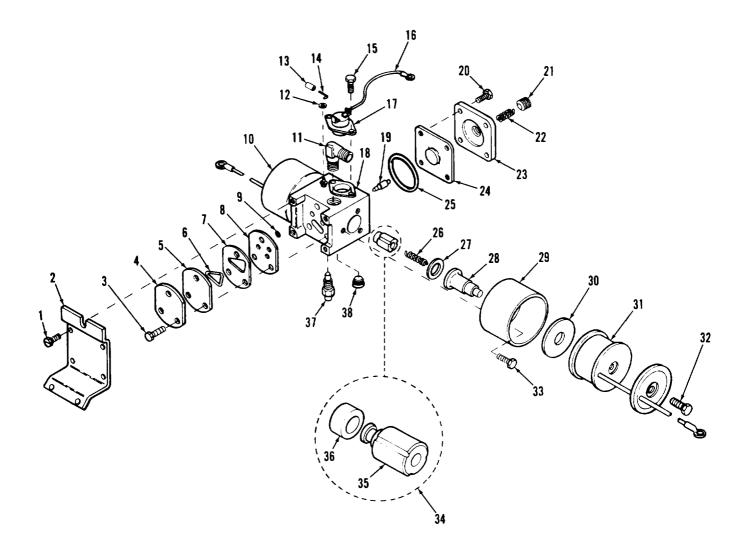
Fuel control ualue-disassembly and assembly.
